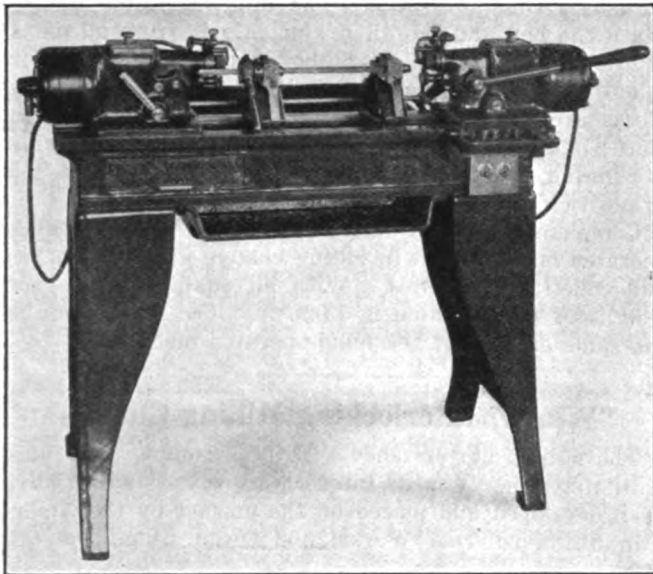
PRATT & WHITNEY HAND CENTERING MACHINE
